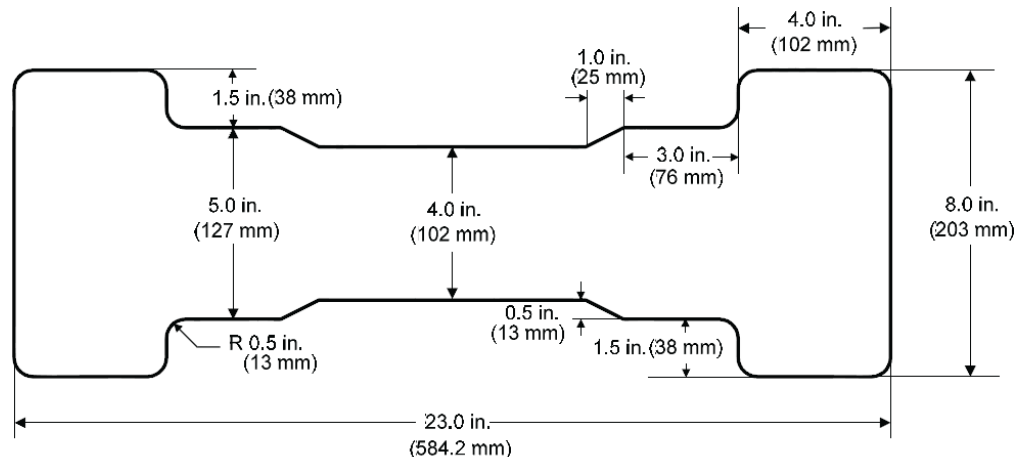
Uniaxial DTT specimen dimensions (S.-H. Chao 2011)
